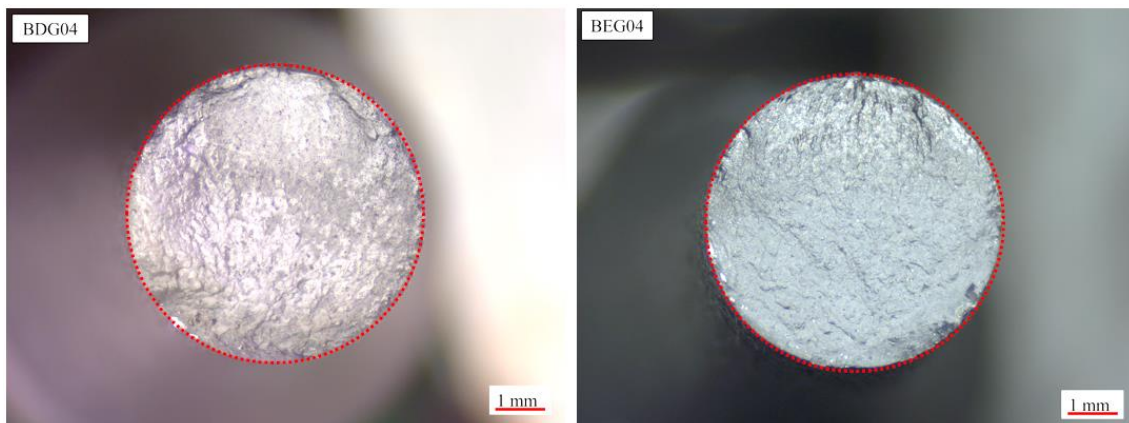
Stereoscopic images of fracture surfaces in slanted built and shot-peened samples
